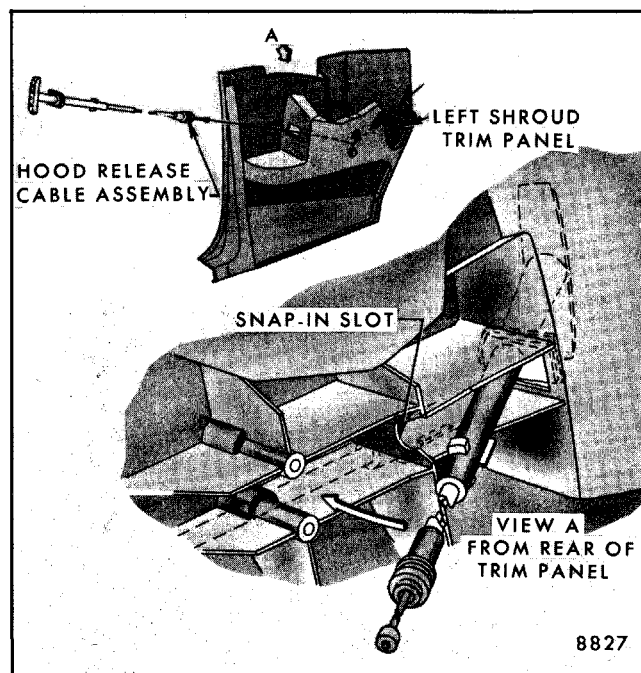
Hood Latch Release Cable - "K" Style
